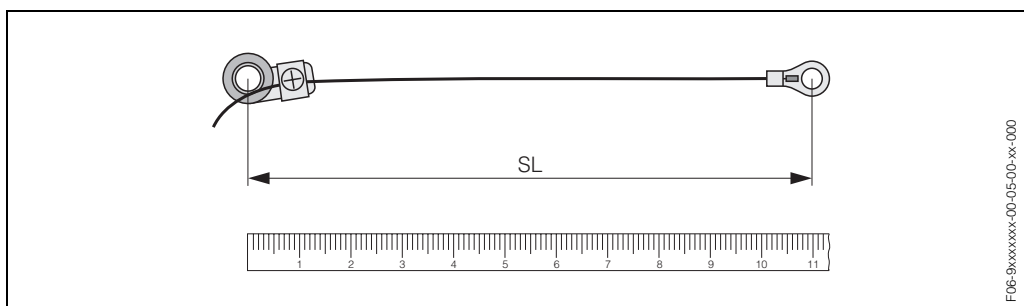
Marking the determined wire length on the wire measurement equipment (SL = wire length)
